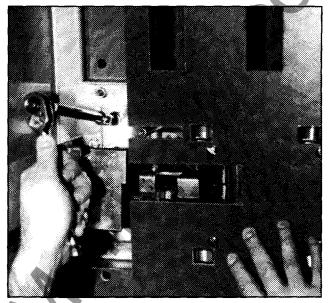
Mounting Channel and Bracket Assembly with Rear Shutter Panel in Cassette (3000A Three-Pole Model Shown)
